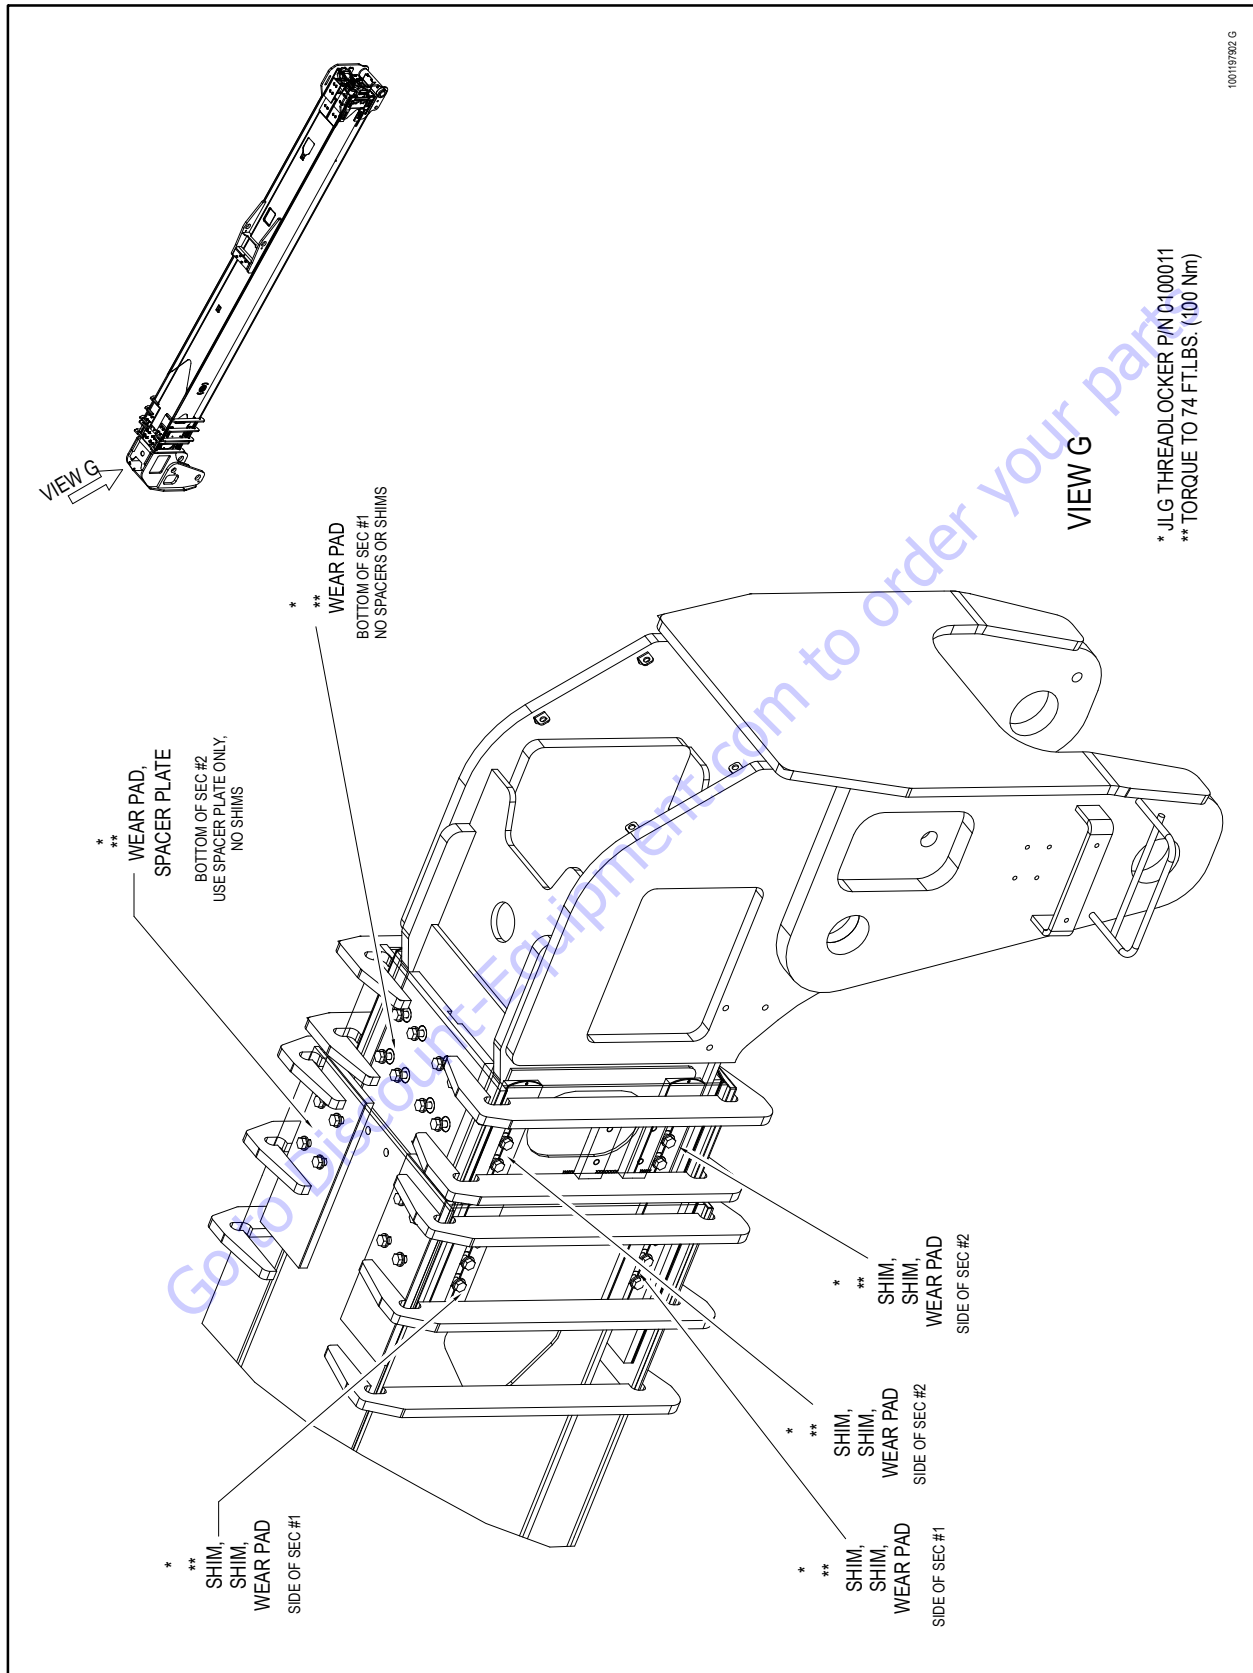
Tower Boom Assembly - Sheet 2 of 6
